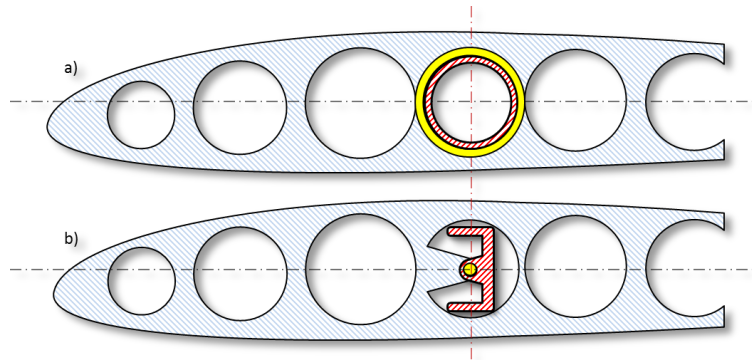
Concentric pivot mechanism: a) plain bearing joint b) pin joint
